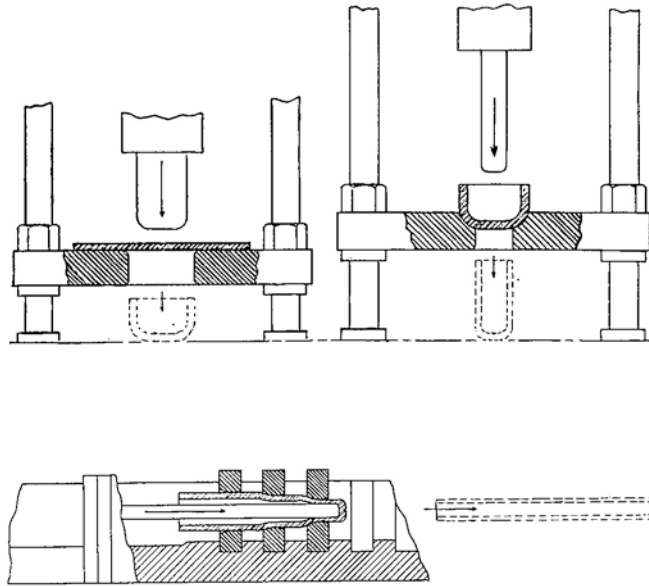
Methods of cupping or hot drawing by the use of single and multiple dies.
